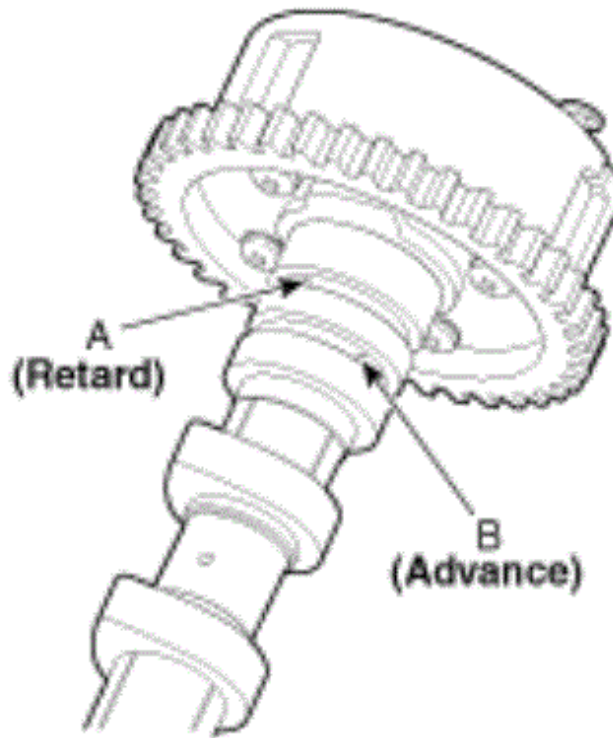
Identifying Retard Hole Of CVVT Assembly
